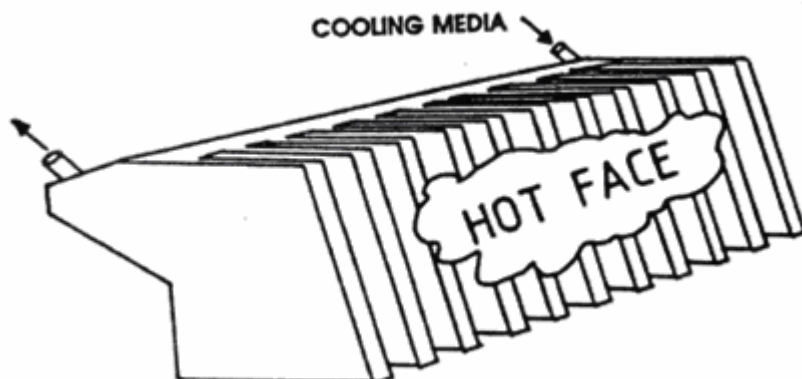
Copper moulded blocks which can help to reduce slagline refractory wear
